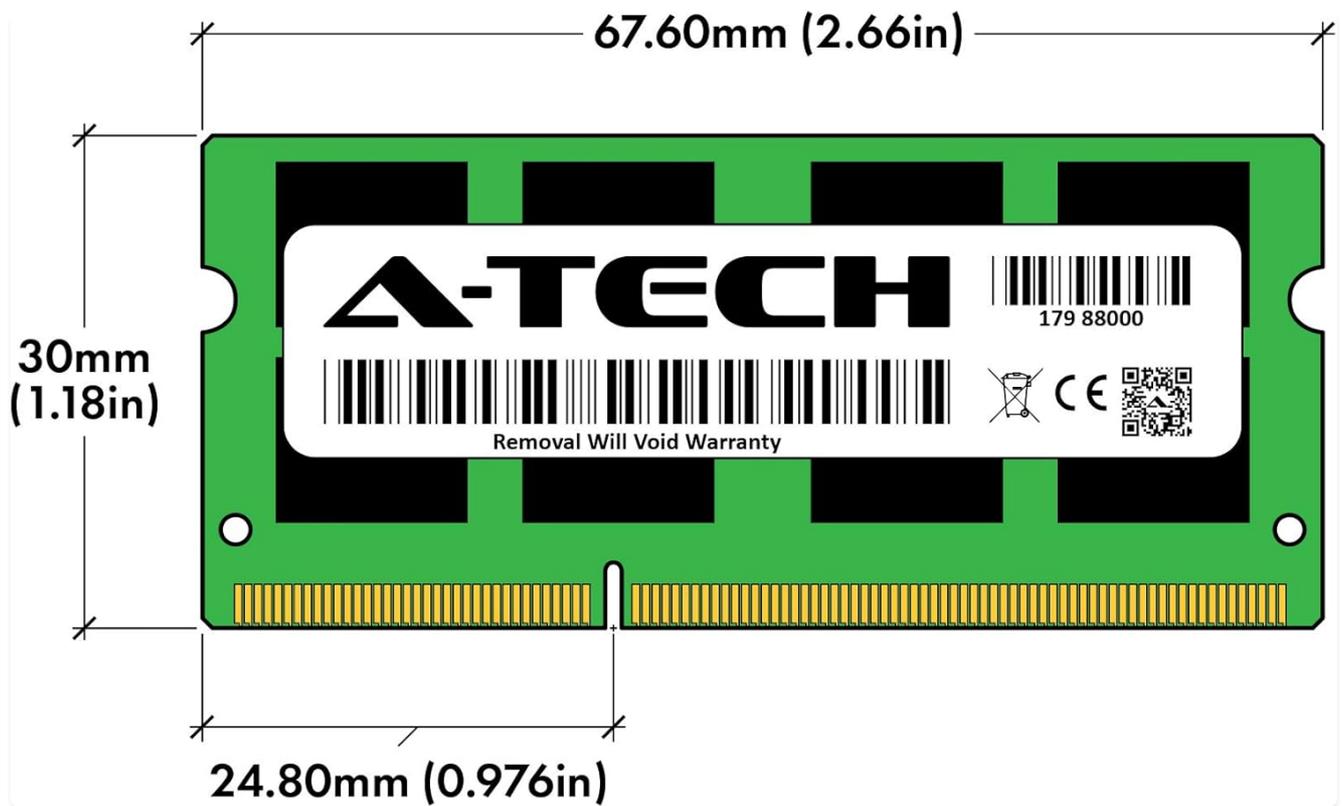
Detailed dimensions of an A-Tech SO-DIMM module.
